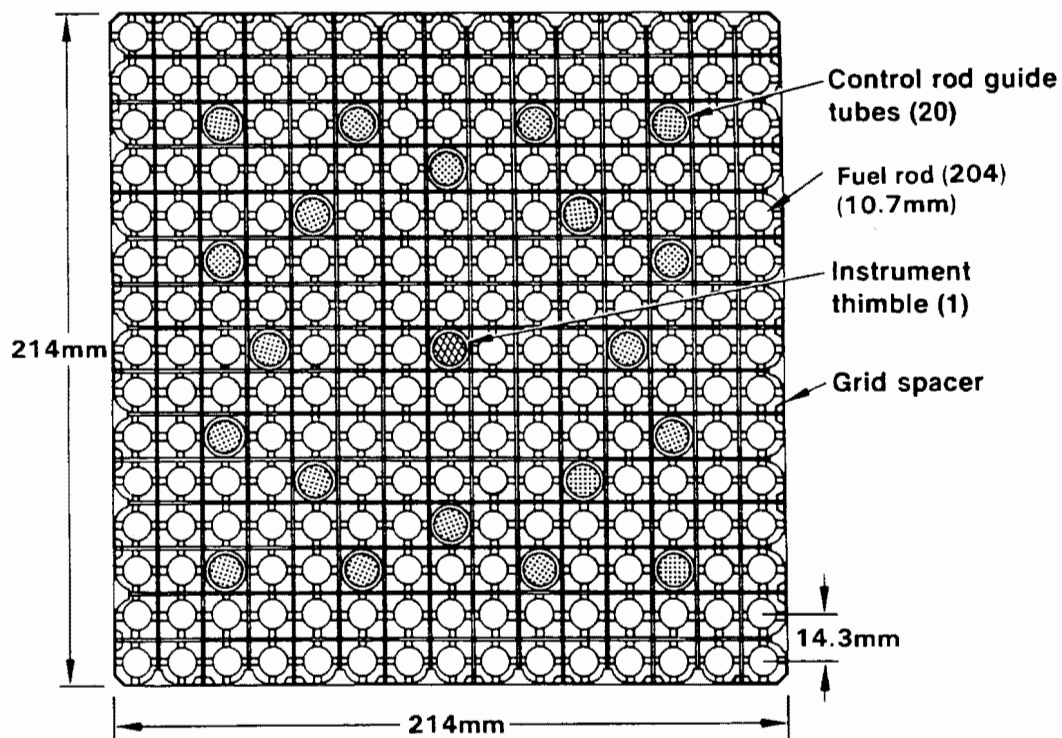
Surry 15 x 15 PWR Fuel Assembly Cross Section
